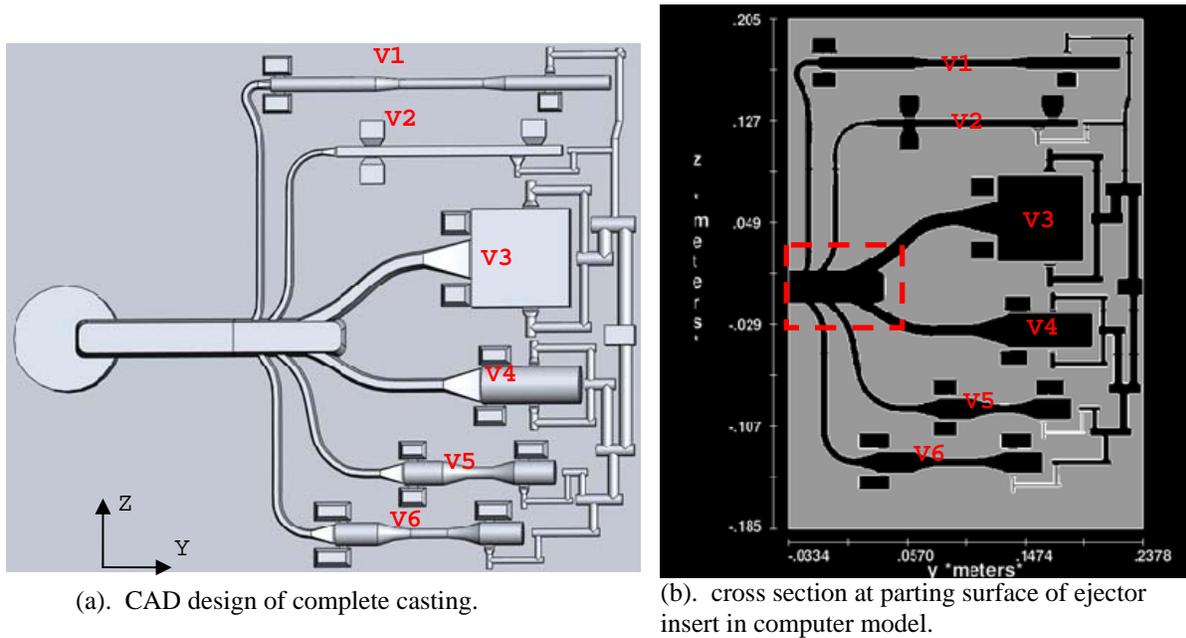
CAD design of complete casting (a) and cross section at parting surface of ejector insert in computer model (b) for original runner design.
